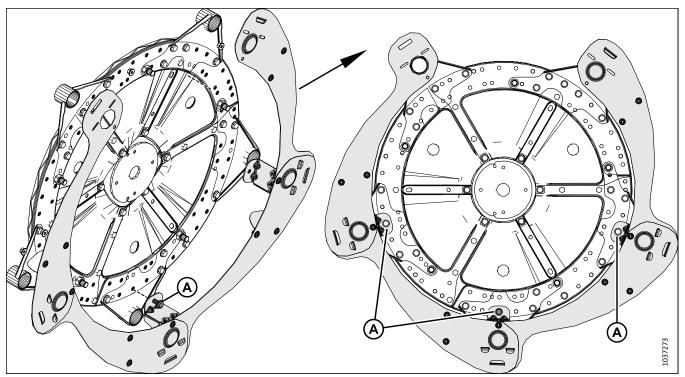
Five-Bat Reel – Partially Assembled Reel Endshields on Reel
